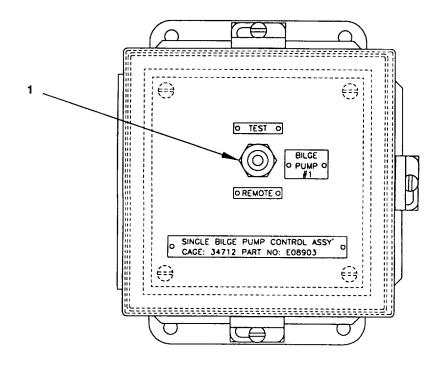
Single Bilge Pump Control Assembly (A7).
